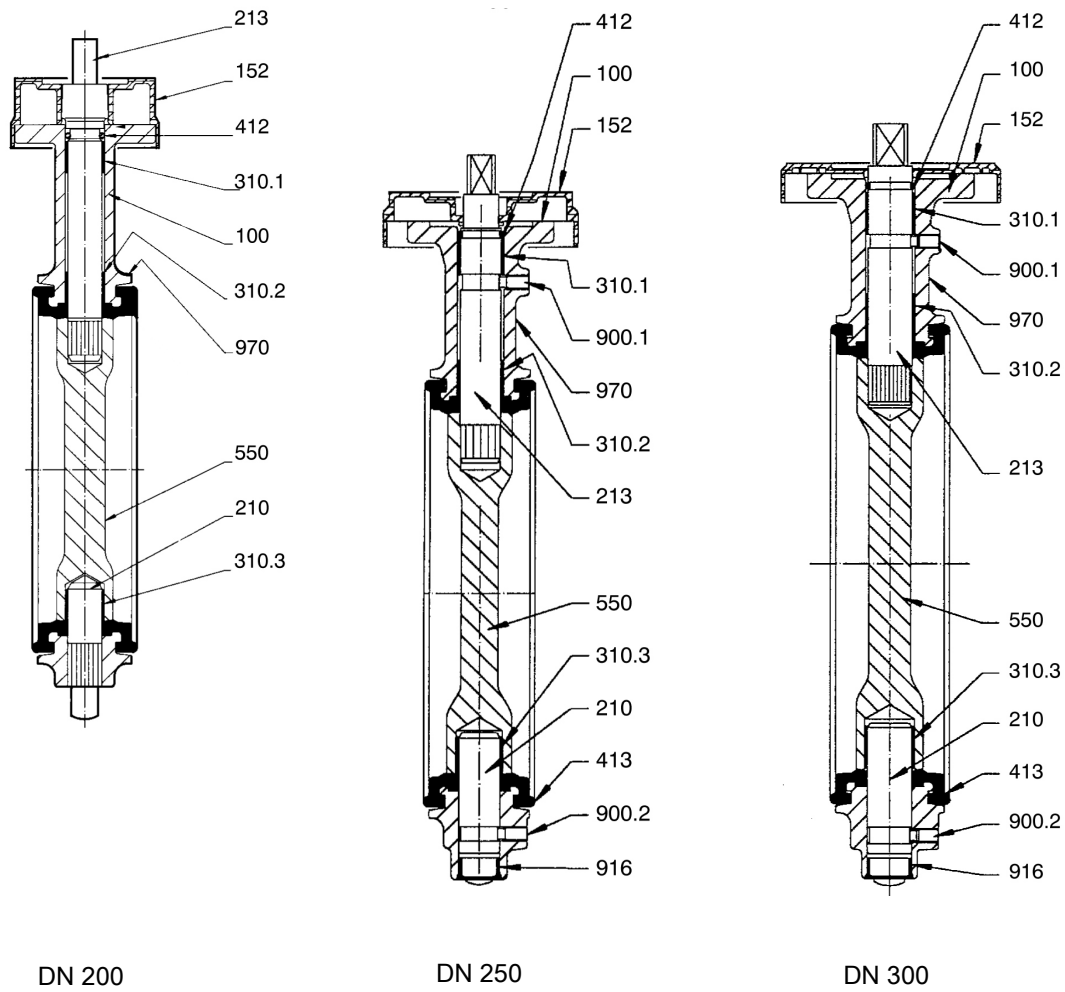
Sectional drawings of BOAX-S/SF DN 200 to DN 300
